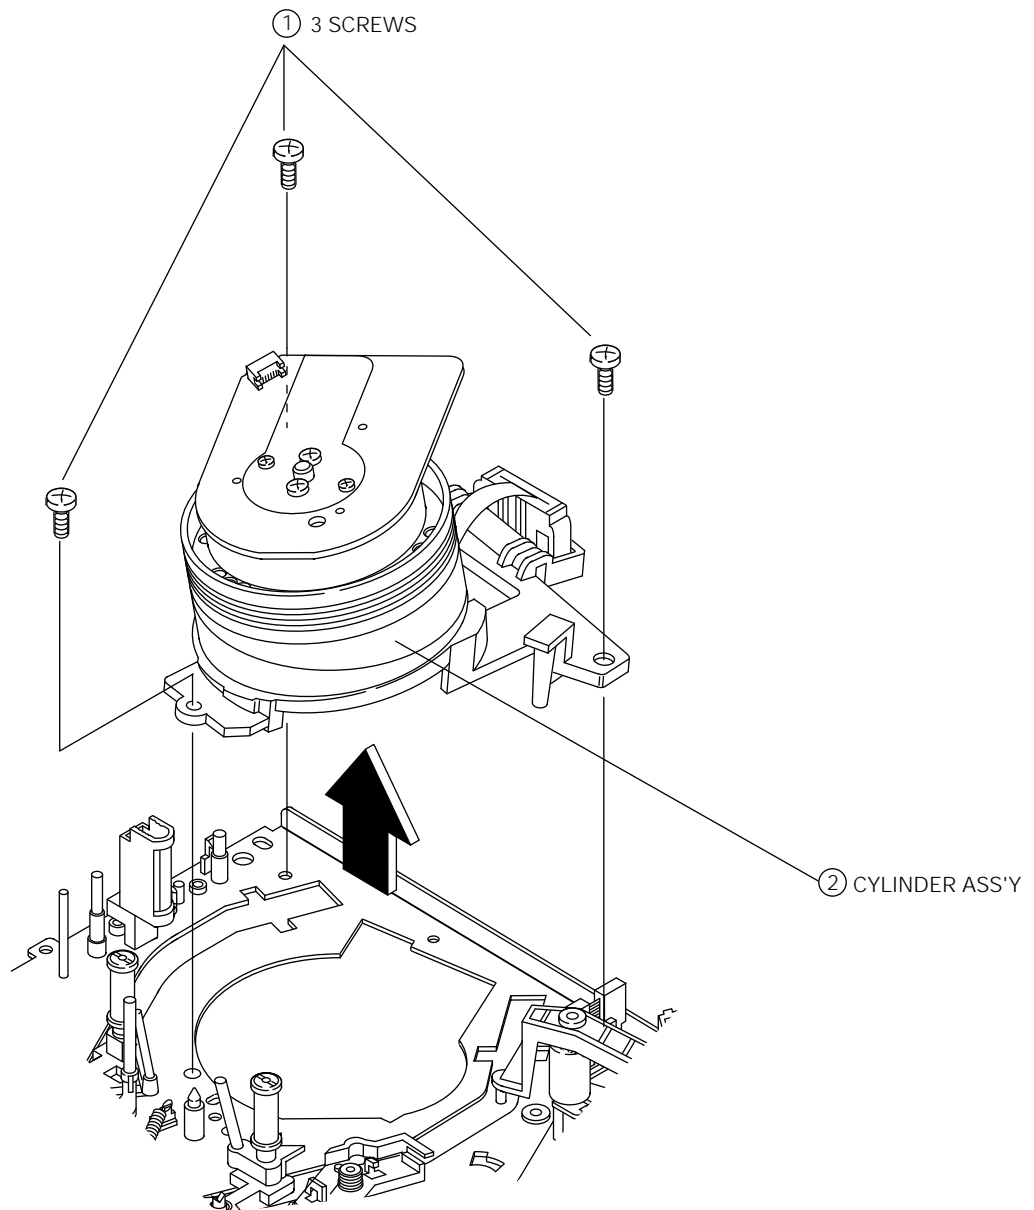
Cylinder Ass'y Removal from Main Base
